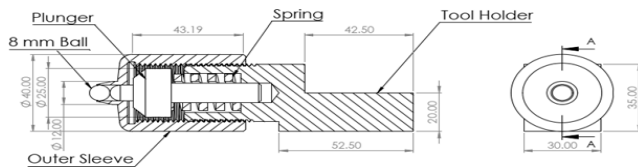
Spring-assisted burnishing tool designed and manufactured with a 20 x 20 mm tool shank.
